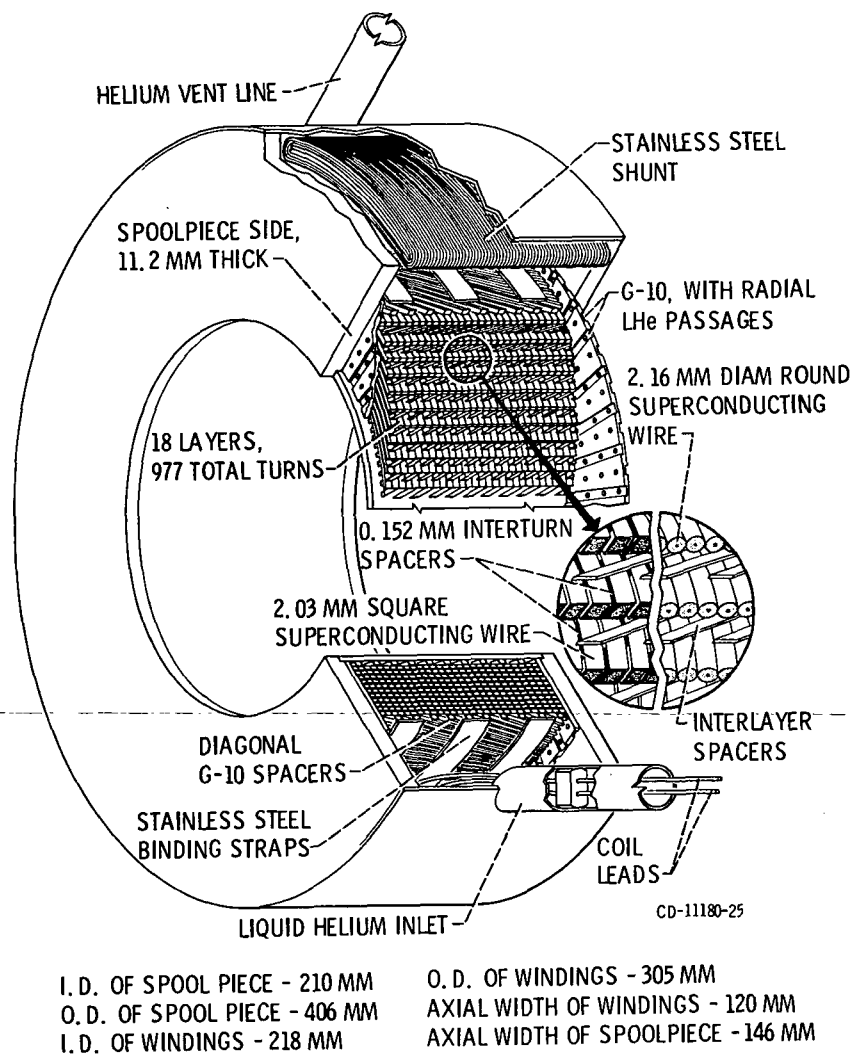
Isometric cutaway drawing of a superconducting coil. The insert shows the details of the cooling passages in the round and square wire coils.
